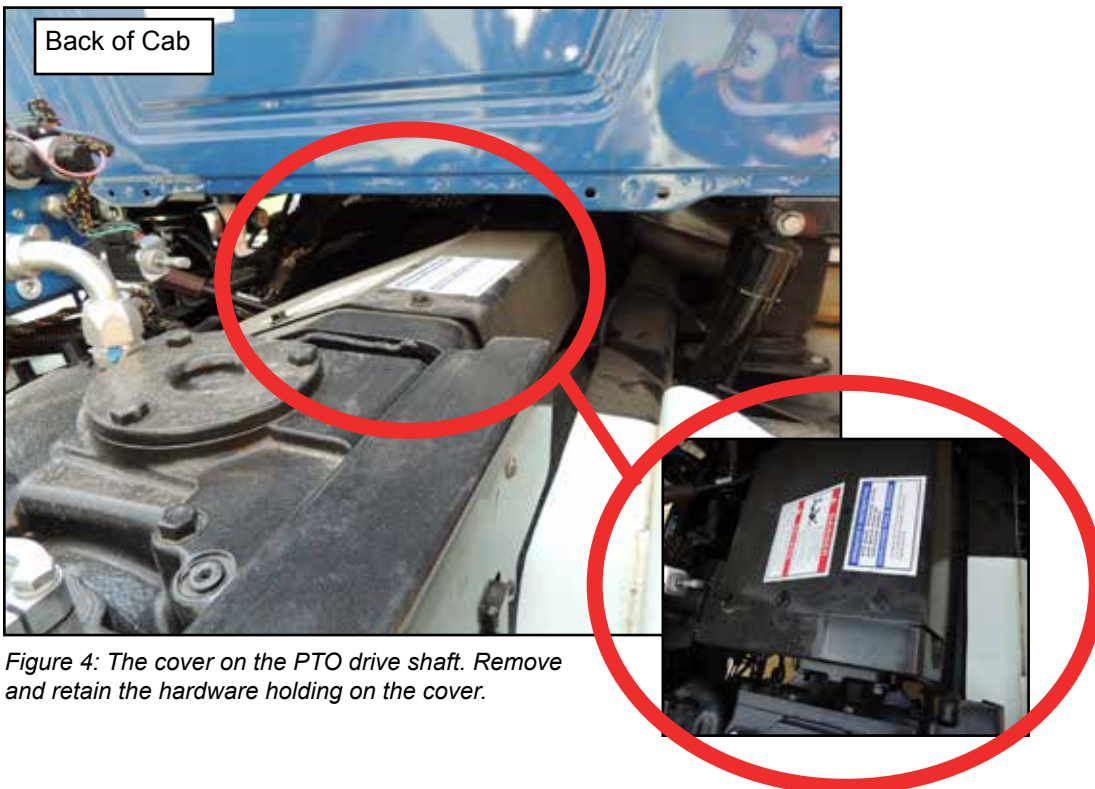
The cover on the PTO drive shaft. Remove and retain the hardware holding on the cover.
